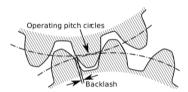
Contact between the pinion tooth and the tooth of the slewing ring.
